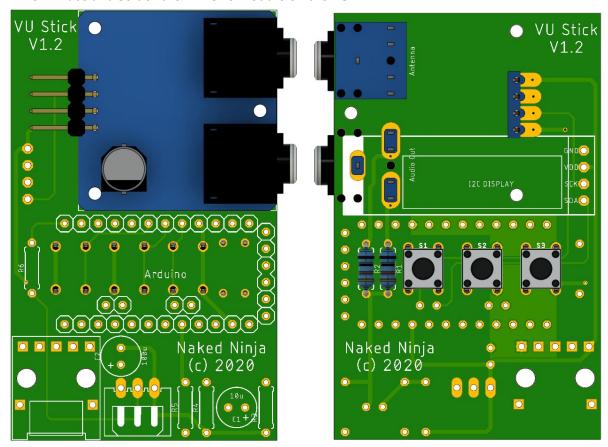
& 8: Back and front view of the VU Stick V1.2 PCB with TEA576 module.
